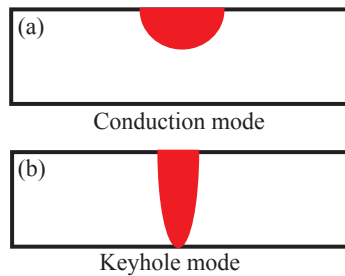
The two operational modes of laser beam welding; (a) conduction mode and (b) keyhole mode.
